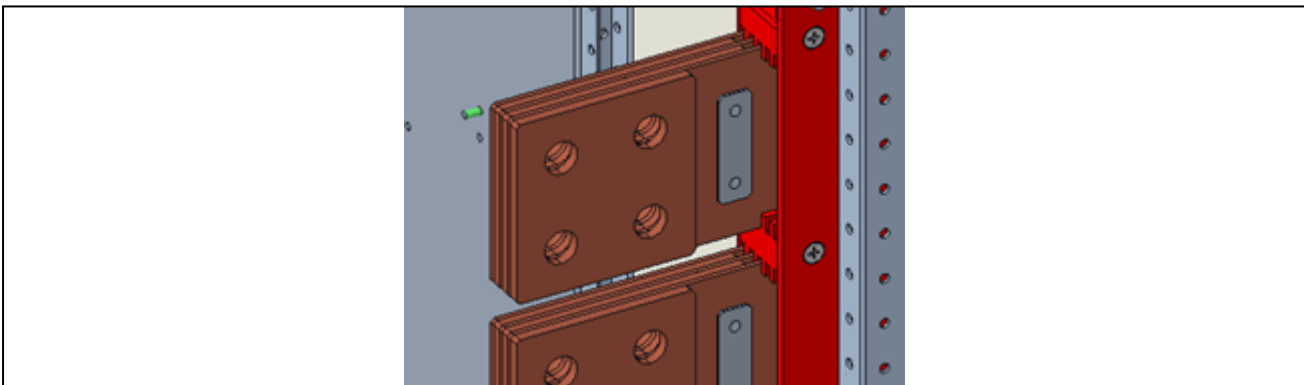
Front Side View, Final Installation of Copper Bars from STS to Cores
